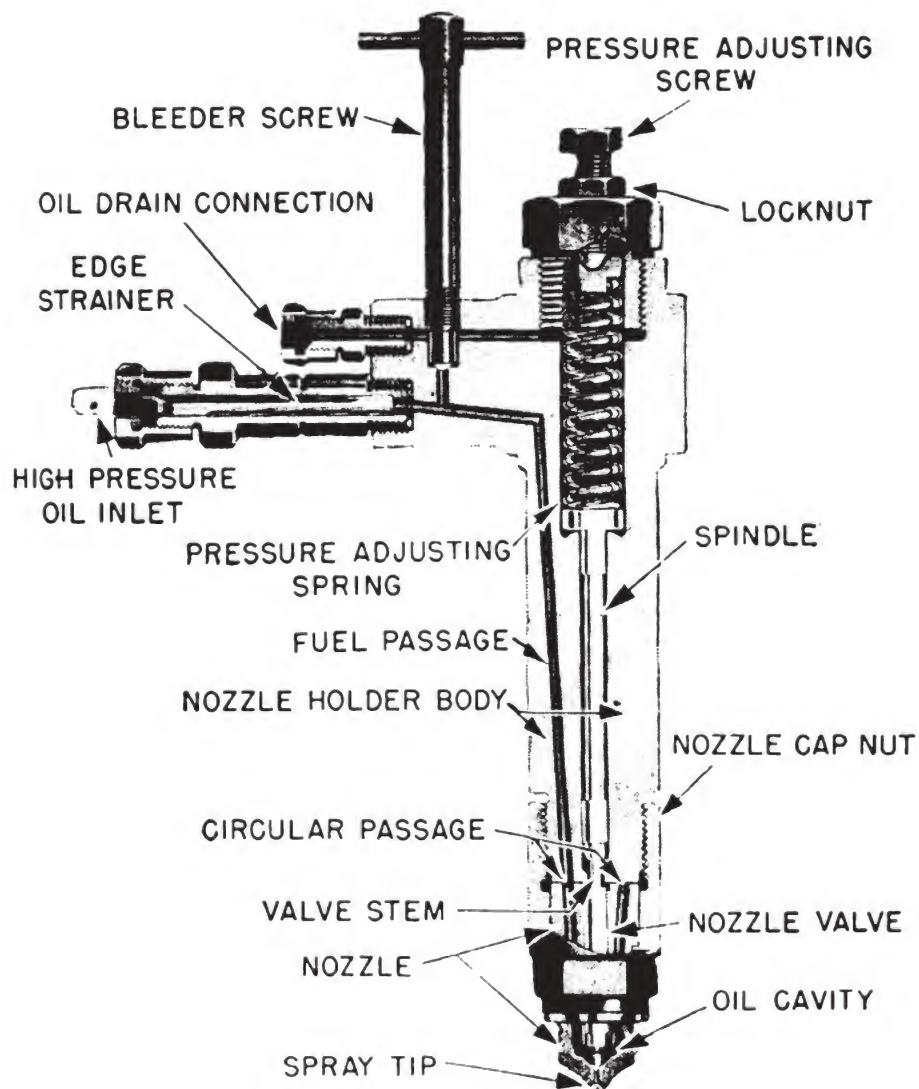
Sectional view of Bosch injection nozzle assembly.
